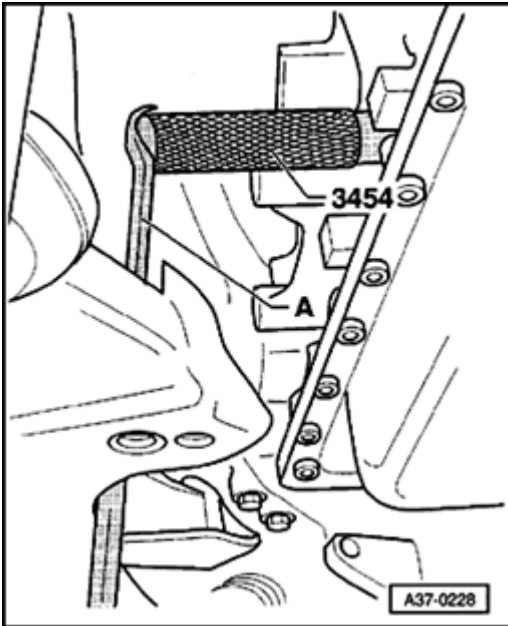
Sliding Sealing Ring Onto Assembly Sleeve 3454 And Pressing In Until Stop
